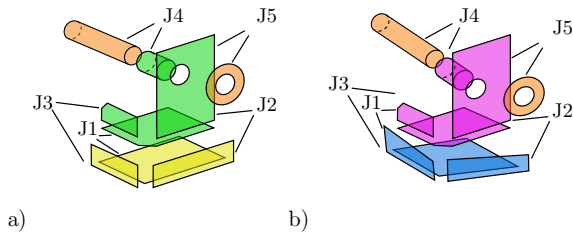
Surfaces defining the assembly joints (a) initial product representation, (b) hybrid product representation.
